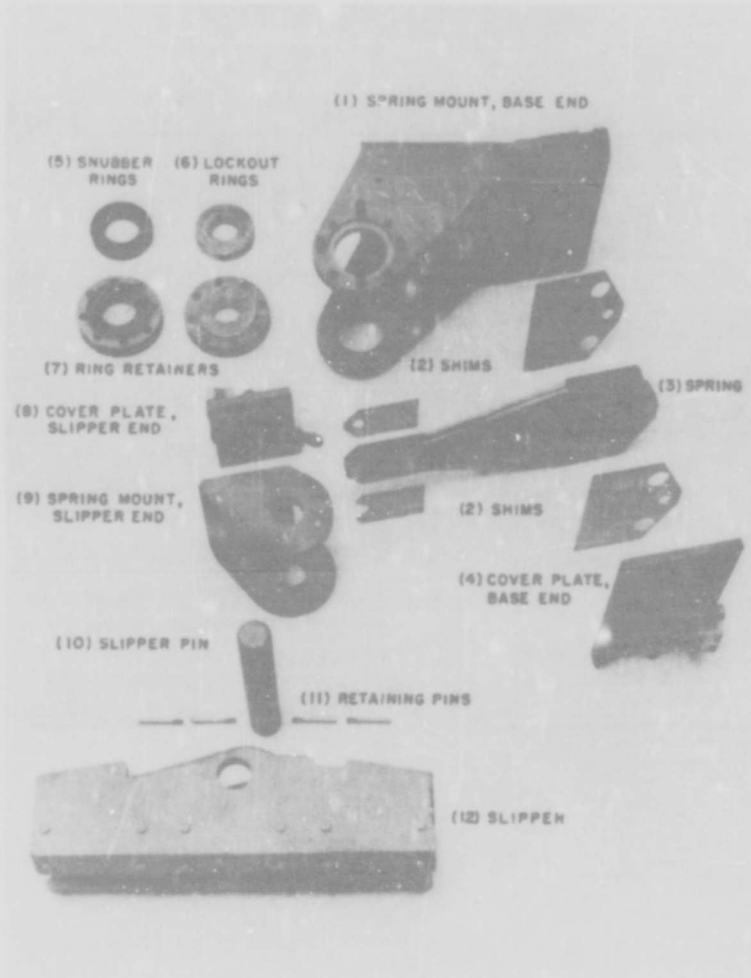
Exploded View of Right Front SRI Slipper Mount.
